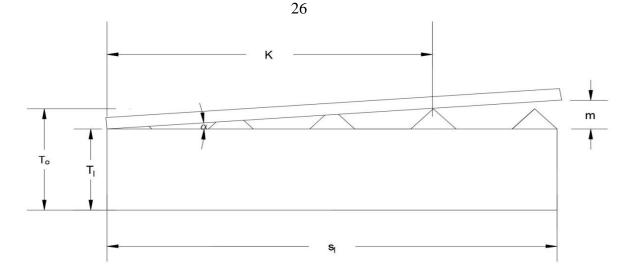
Idealized version of layer warping opposite weld horn
